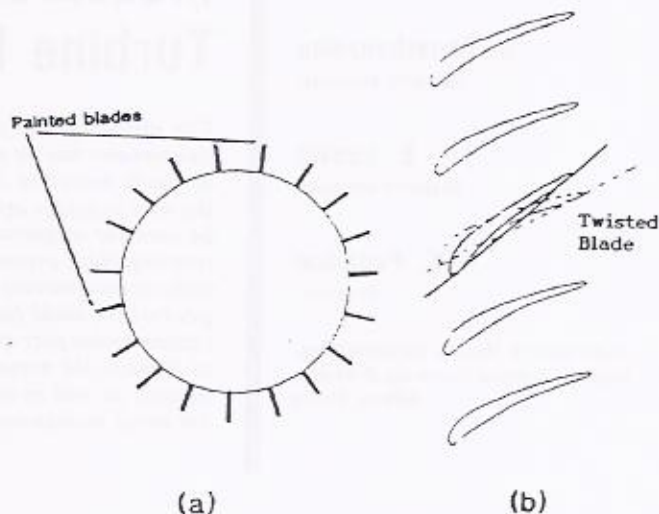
Position of painted blades and schematic of twisted blade of stage 1 rotor
